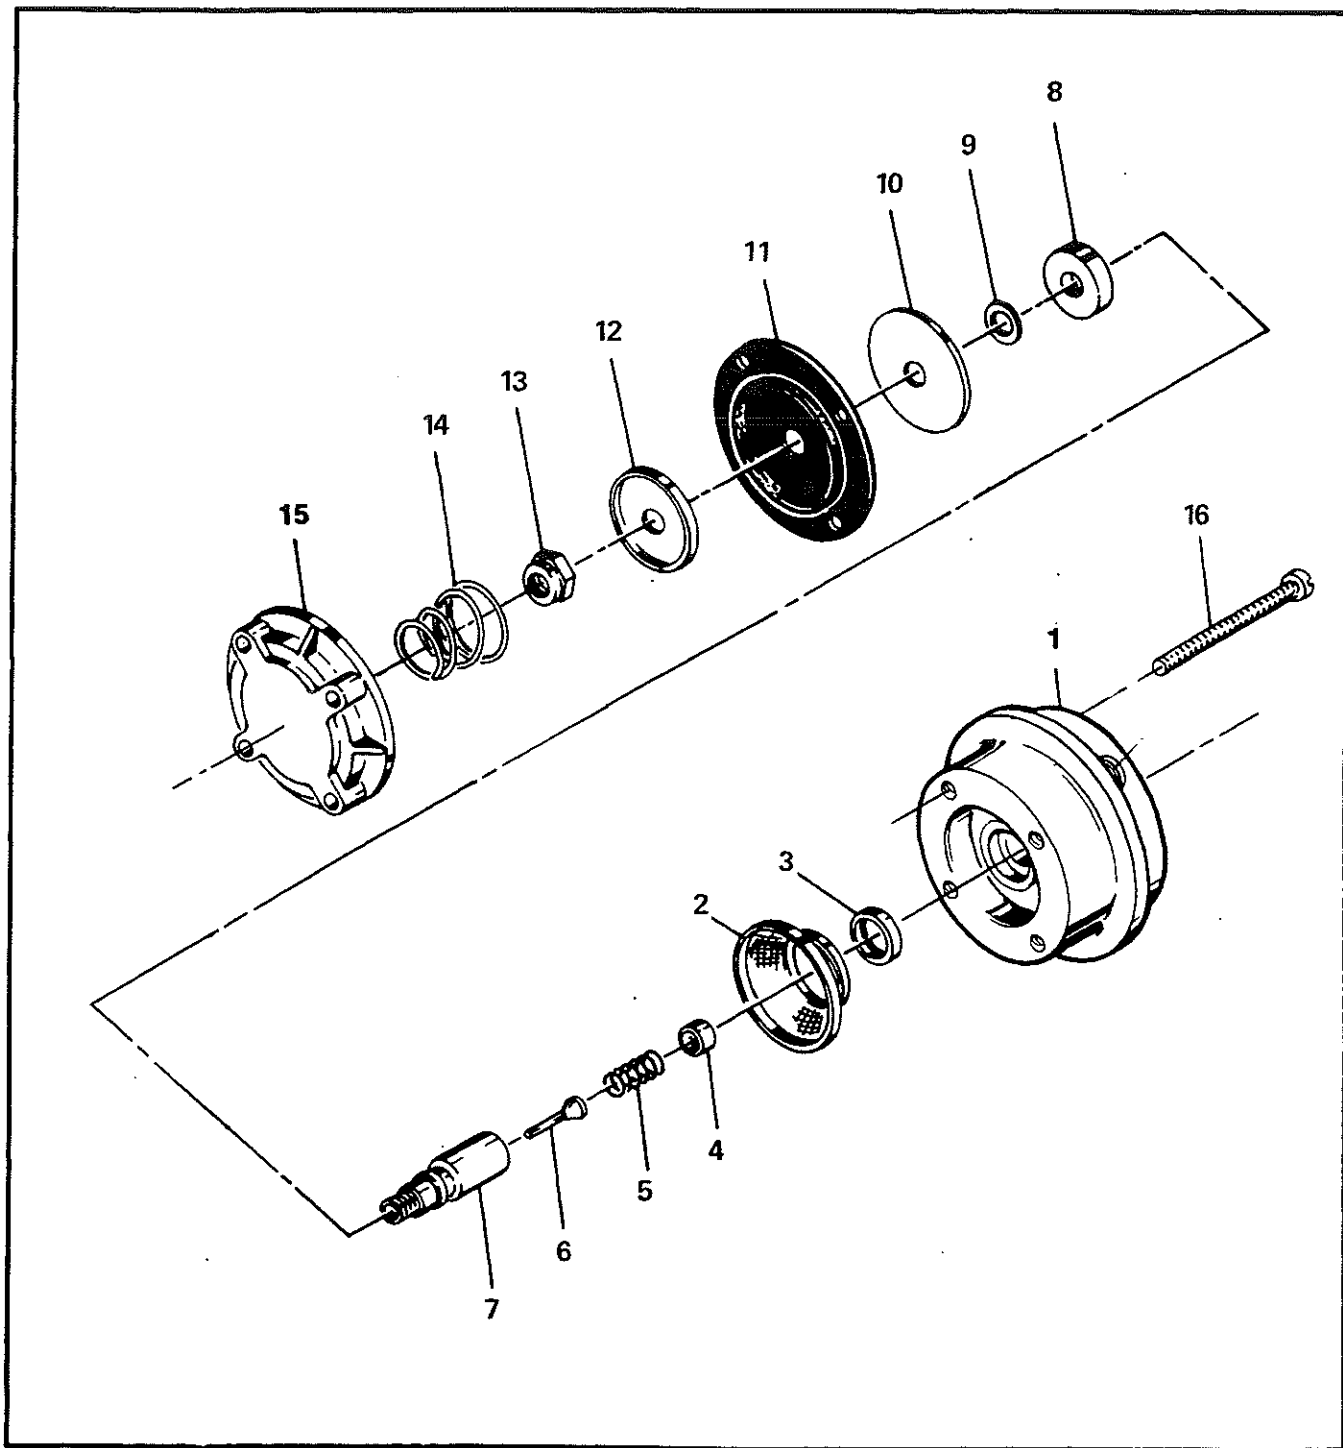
FUEL MANIFOLD VALVE ASSEMBLY.
